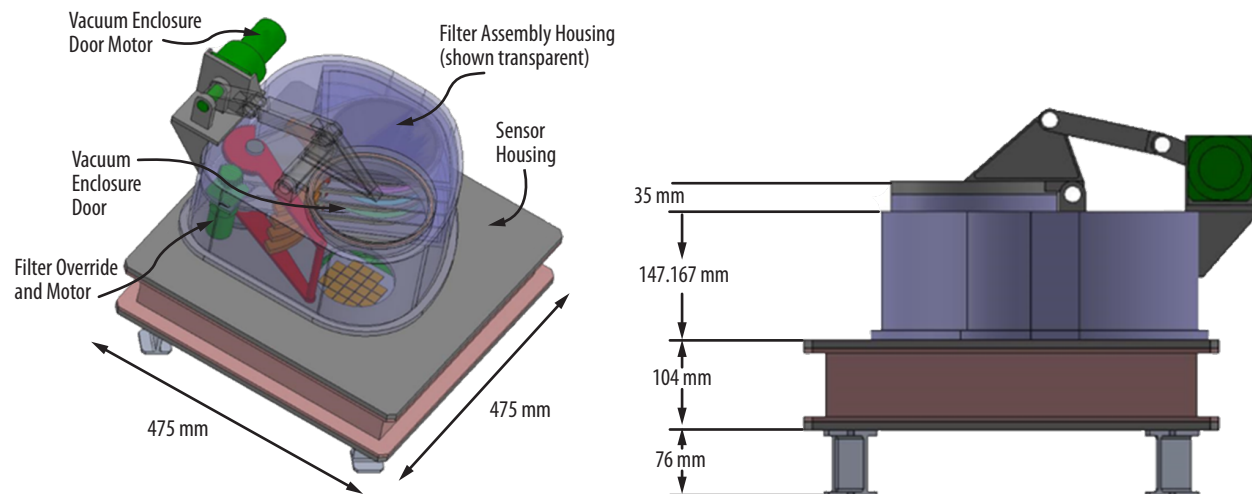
The HDXI showing the filter mechanism and vacuum housing. The DEU is not shown, as it is located on ISIM.
